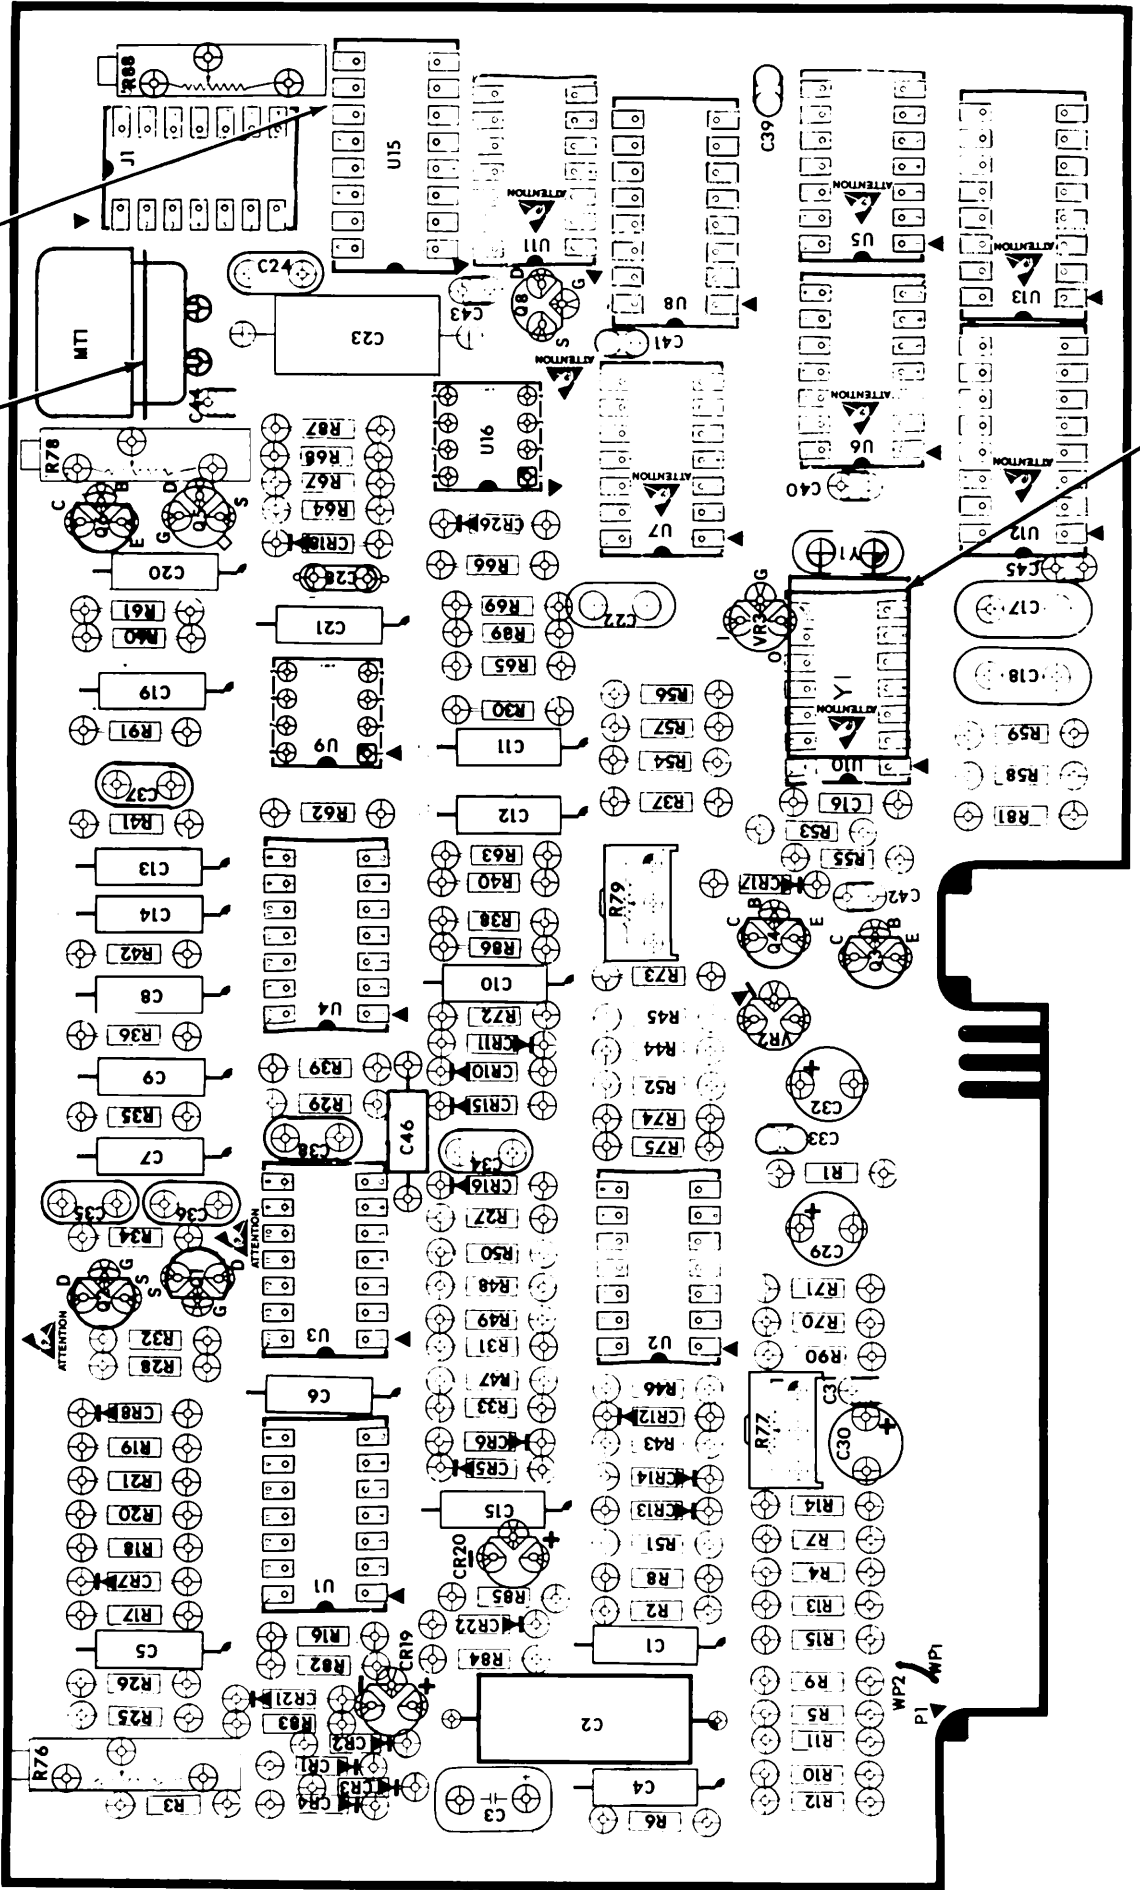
SYSTOLE PROCESSOR PCB ASSEMBLY
